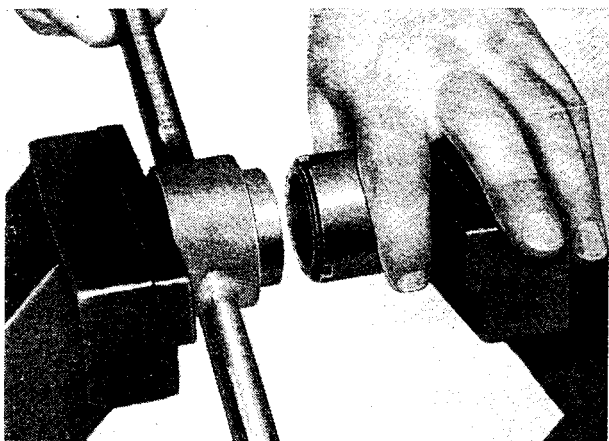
Pressing the packing ring into threaded ring by means of the combined assembling spanner
